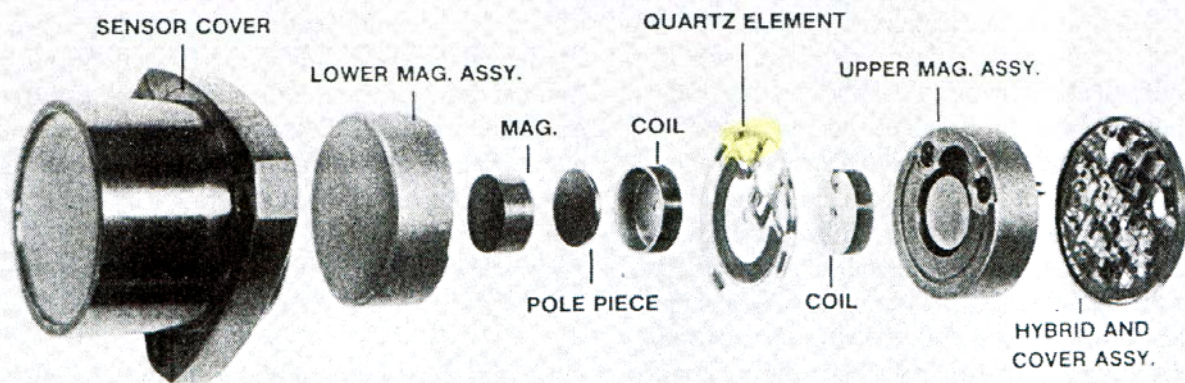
Exploded view of the QA2000 Honeywell accelerometer, from [AlliedSignal, 1998]
